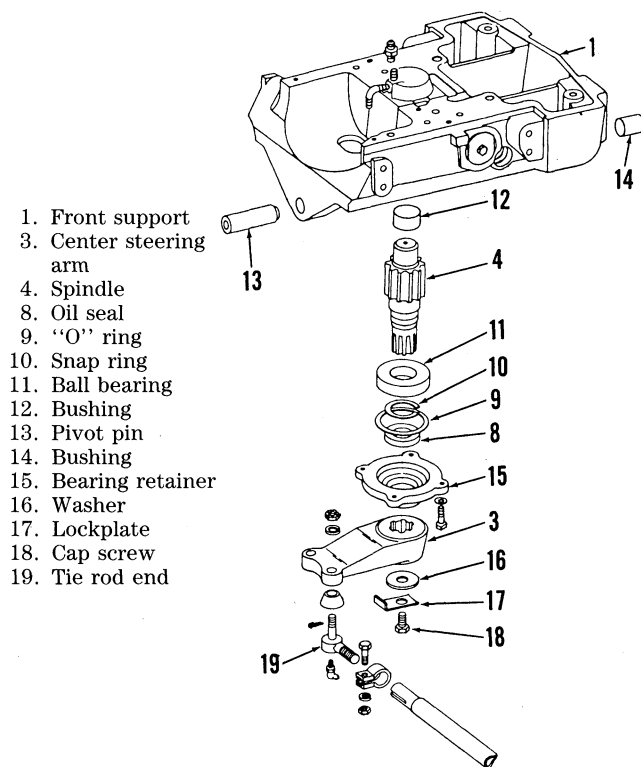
Partially exploded view of front axle support assembly used on 4050, 4250 and 4450 tractors. Support assembly used on 4650 and 4850 tractors is similar.
